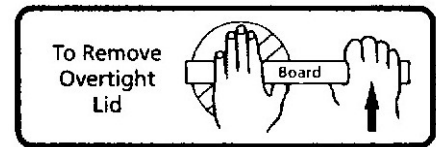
Use a pry bar or board as shown to remove or tighten the trap cover
